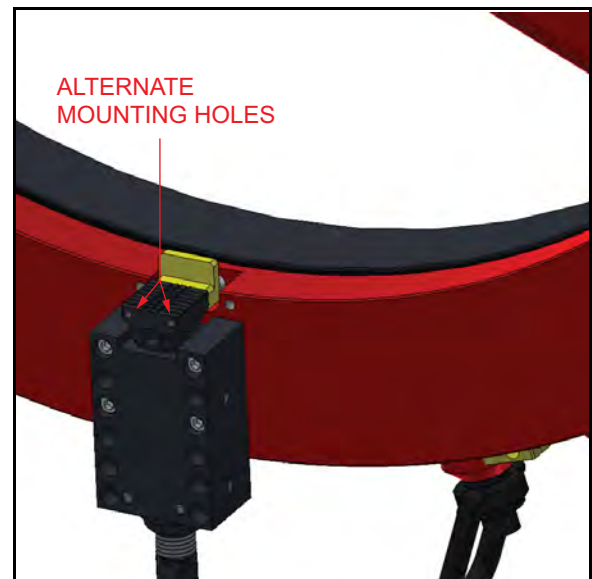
ALTERNATE MOUNTING HOLES
